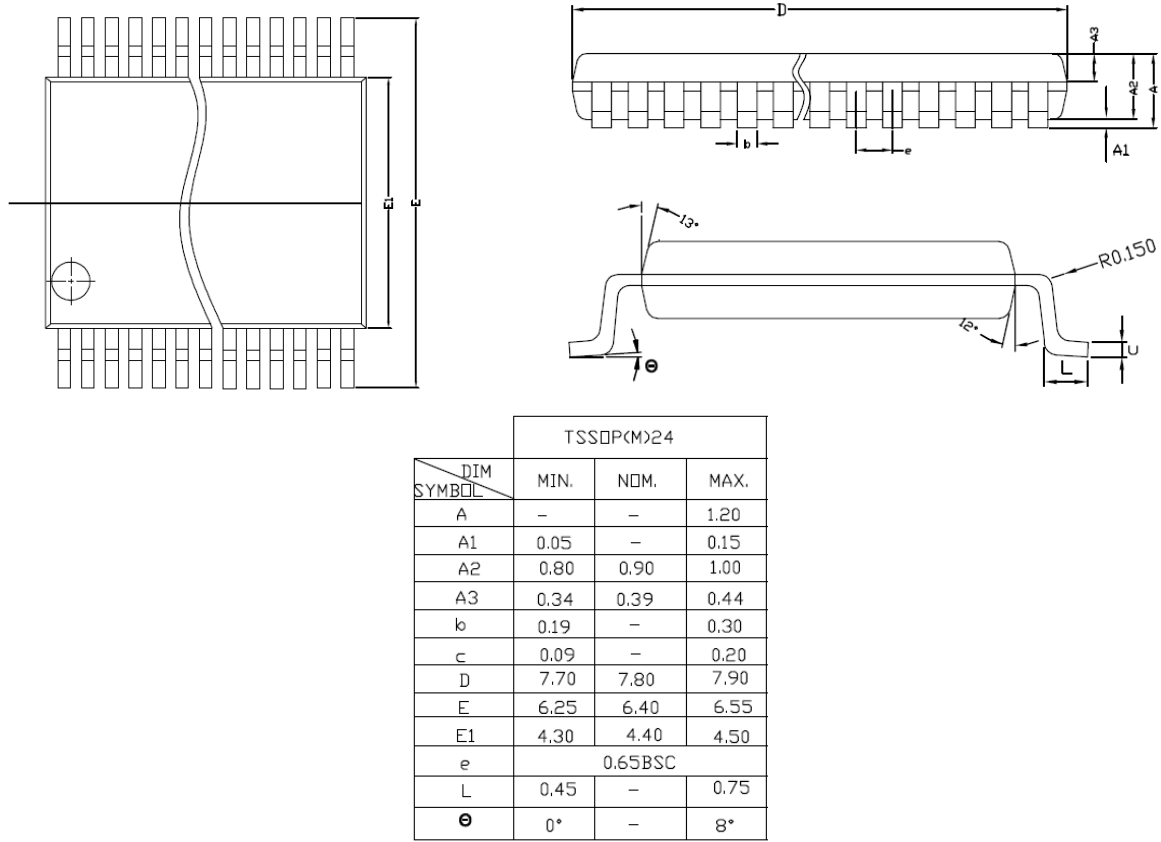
TSSOP24 Package Shape and Dimension in millimeters for NCA84245-DTSXR
